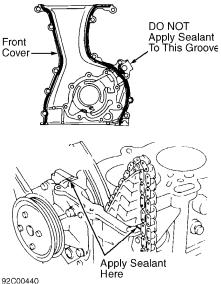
Applying Sealant to Front Cover Courtesy of Nissan Motor Co., U.S.A.
